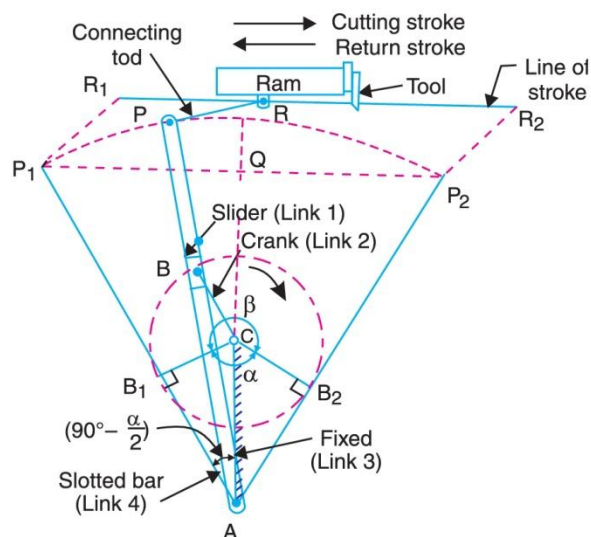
Crank and slotted lever quick return motion mechanism.
